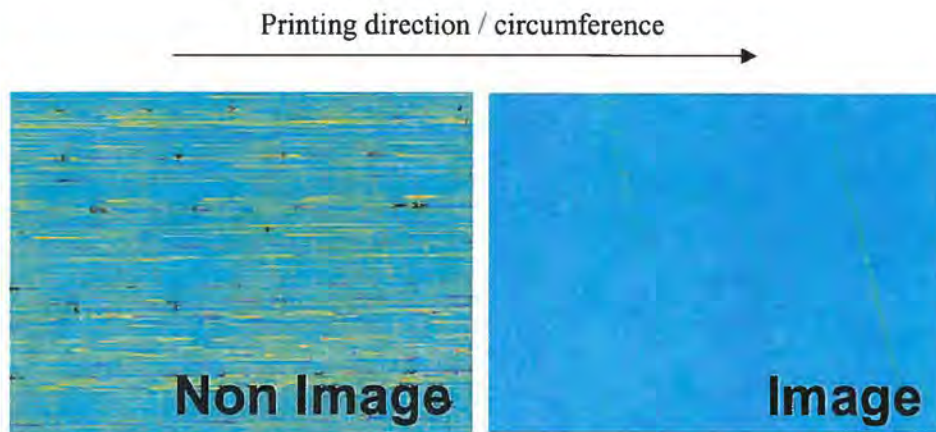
Cylinder surface finish after printing – image²⁰
